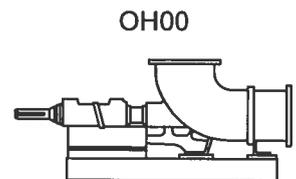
Overhung impeller – flexibly coupled – single stage – axial flow – horizontal
